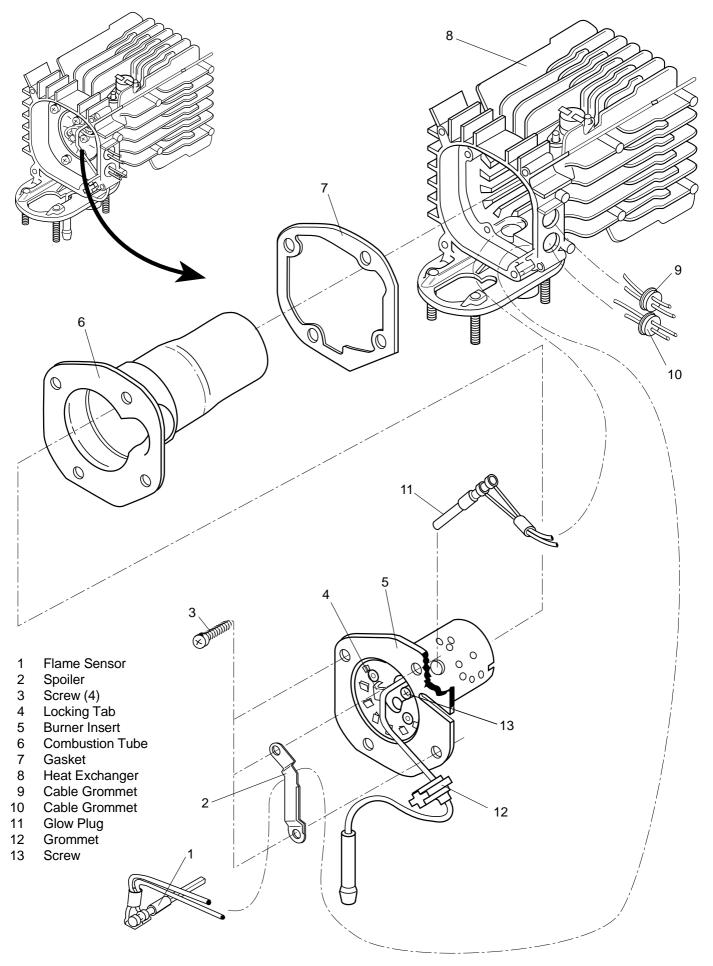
Disassembly of Heat Exchanger (Sheet 1 of 2)
